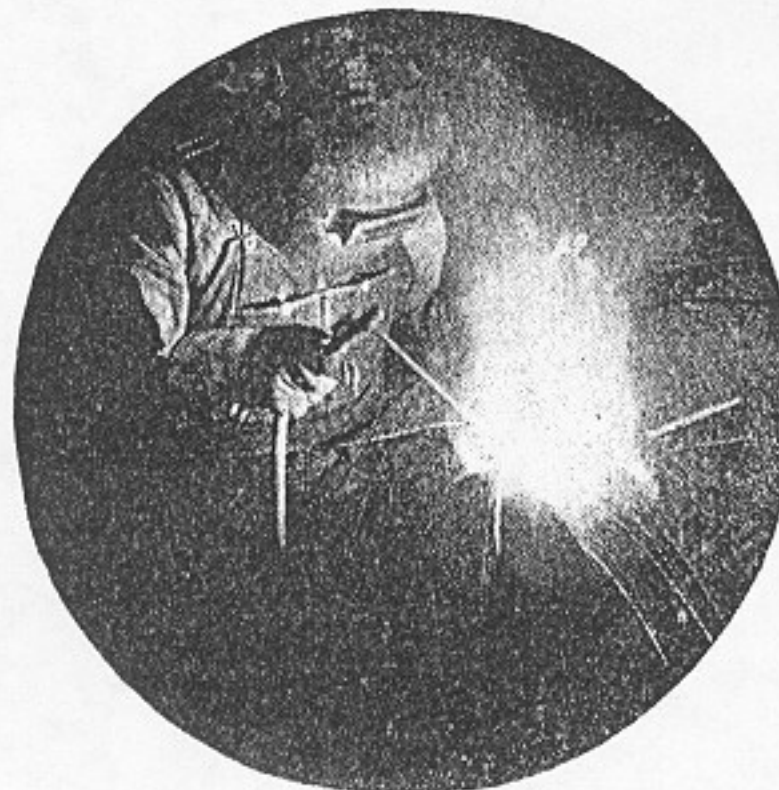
This two-listed welder is at work on tractor rollers. He is manipulating two electrodes.
